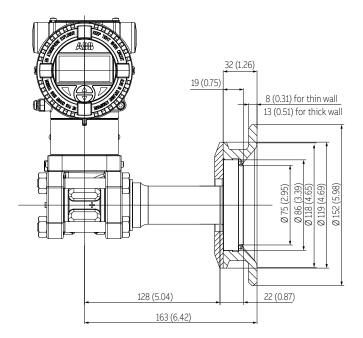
266DRH with barrel housing and direct mount seal S26SS Sanitary flush (For dimensions of S26 seals refer to the S26 datasheet)
